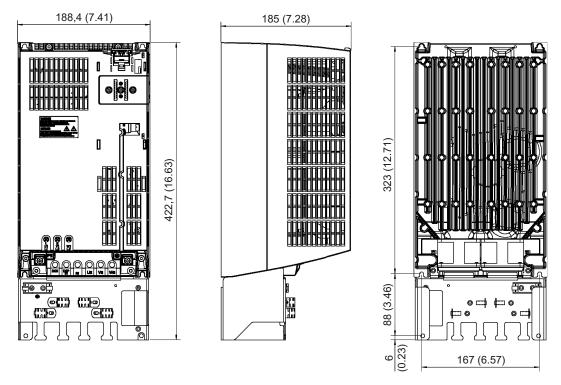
Dimension drawing, PM340 Power Module with screening kit, frame size FSC, dimensions in mm (inches)
